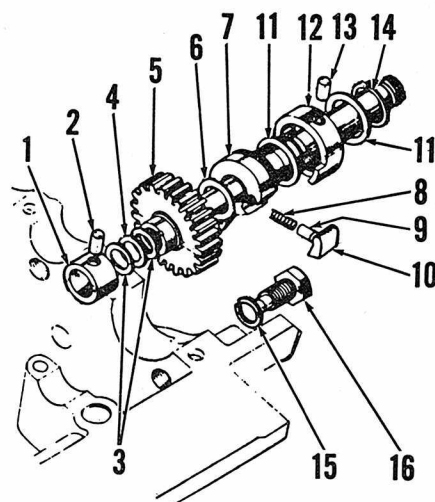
Exploded view of kick starter assembly used on four speed transmission.
